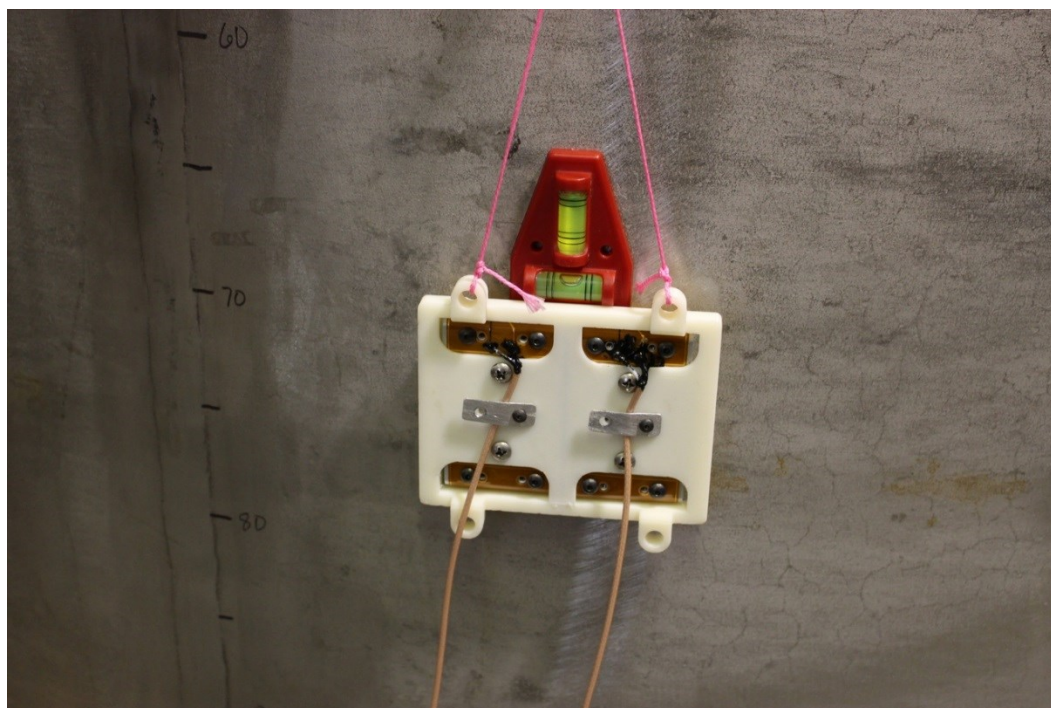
Full-diameter partial height canister mockup with EMAT pair on the right side of the 4 ft long axial weld.
